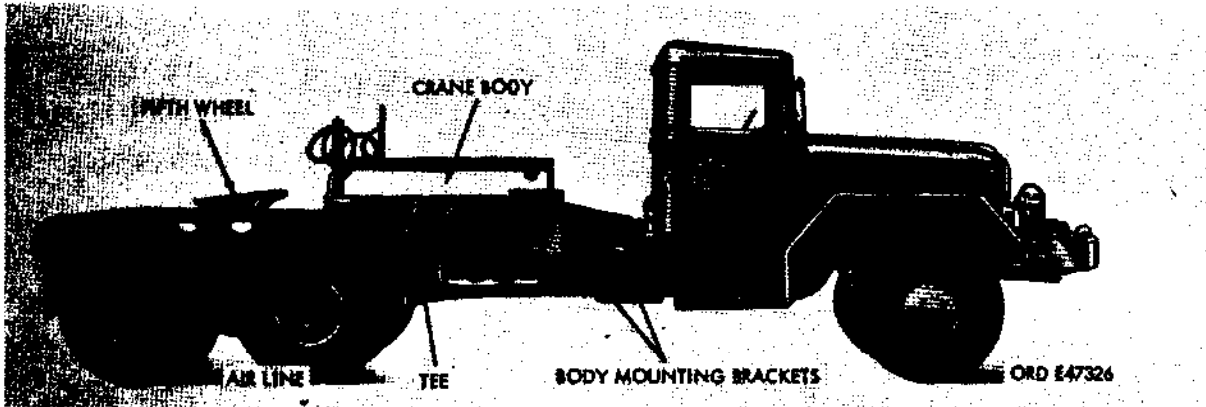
Right side view of tractor wrecker truck M246 with hydraulic crane and reservoir removed
